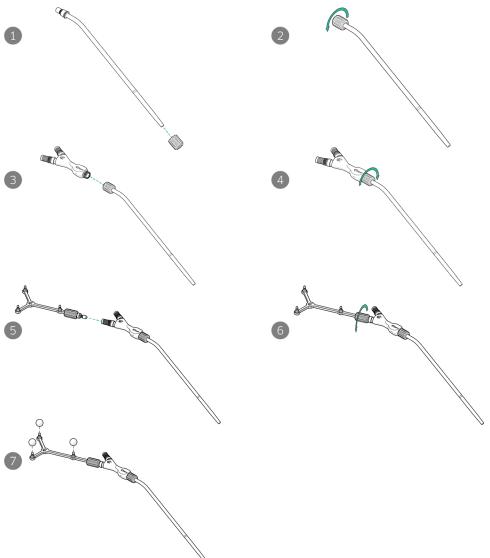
Trackable Suction assembly steps. Reverse these steps to disassemble.
